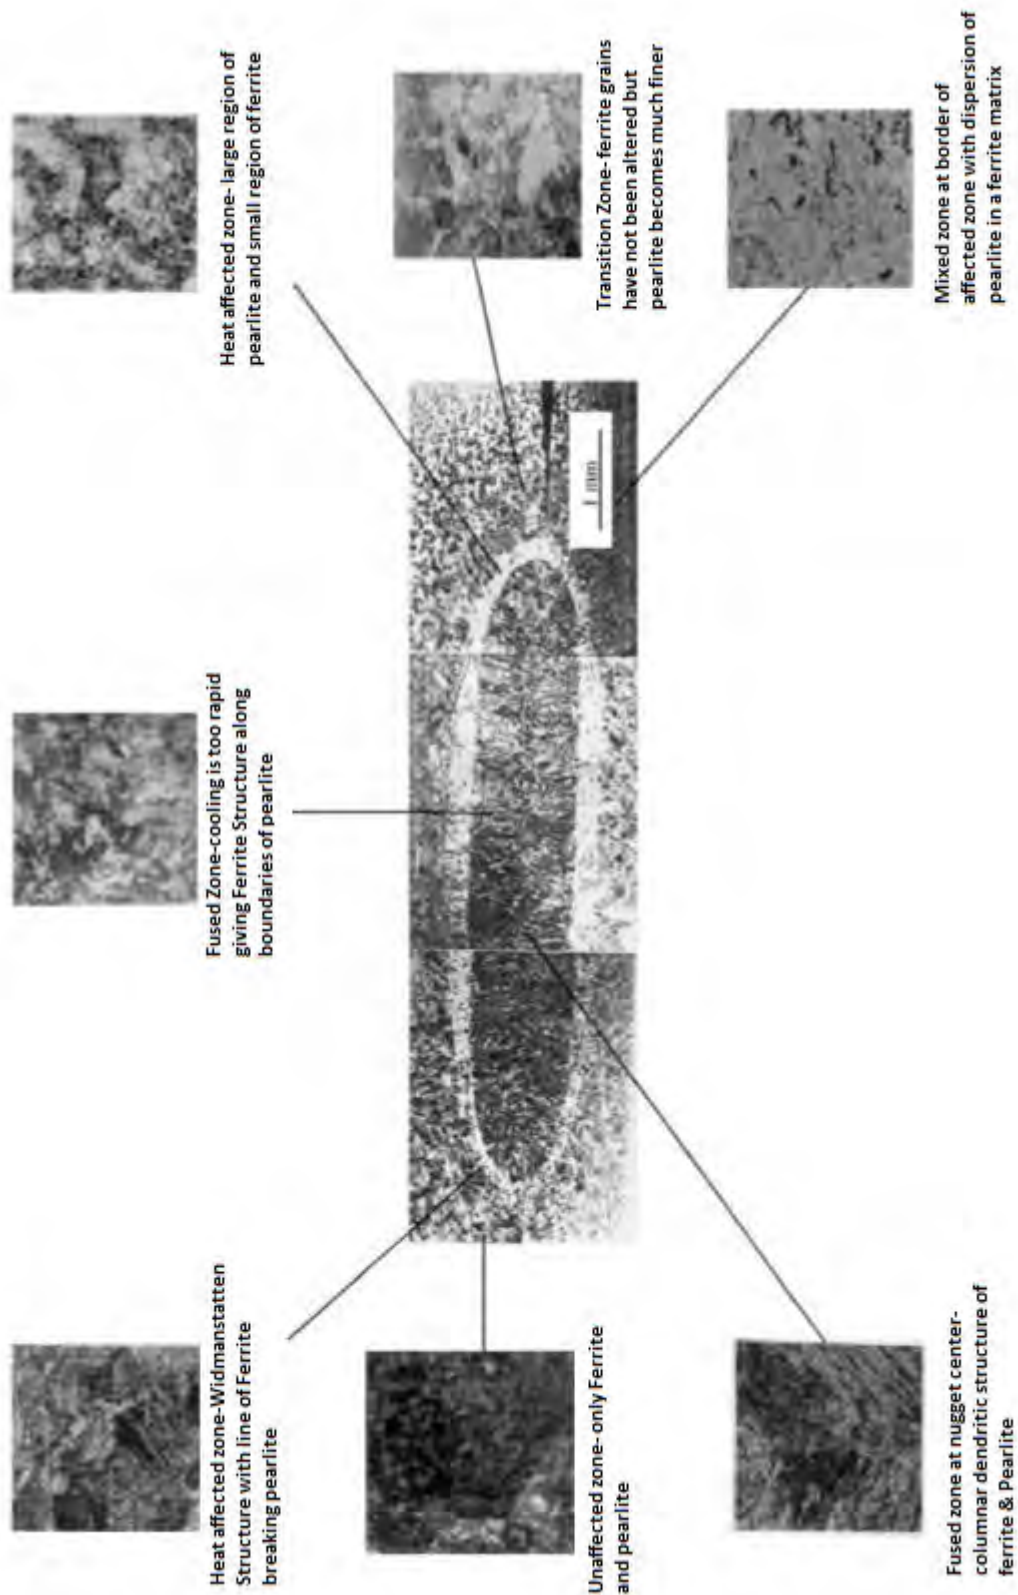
Schematic cross section of spot welded sheet metal
